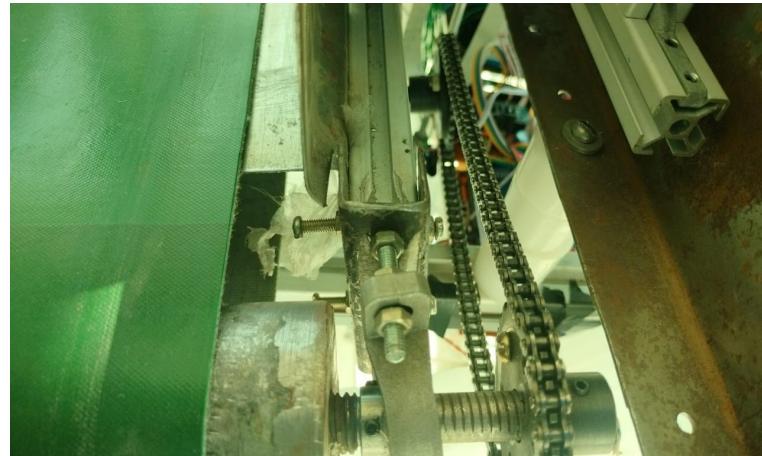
Figure showing a lateral view of the gear-chain mechanism of conveyor 2
